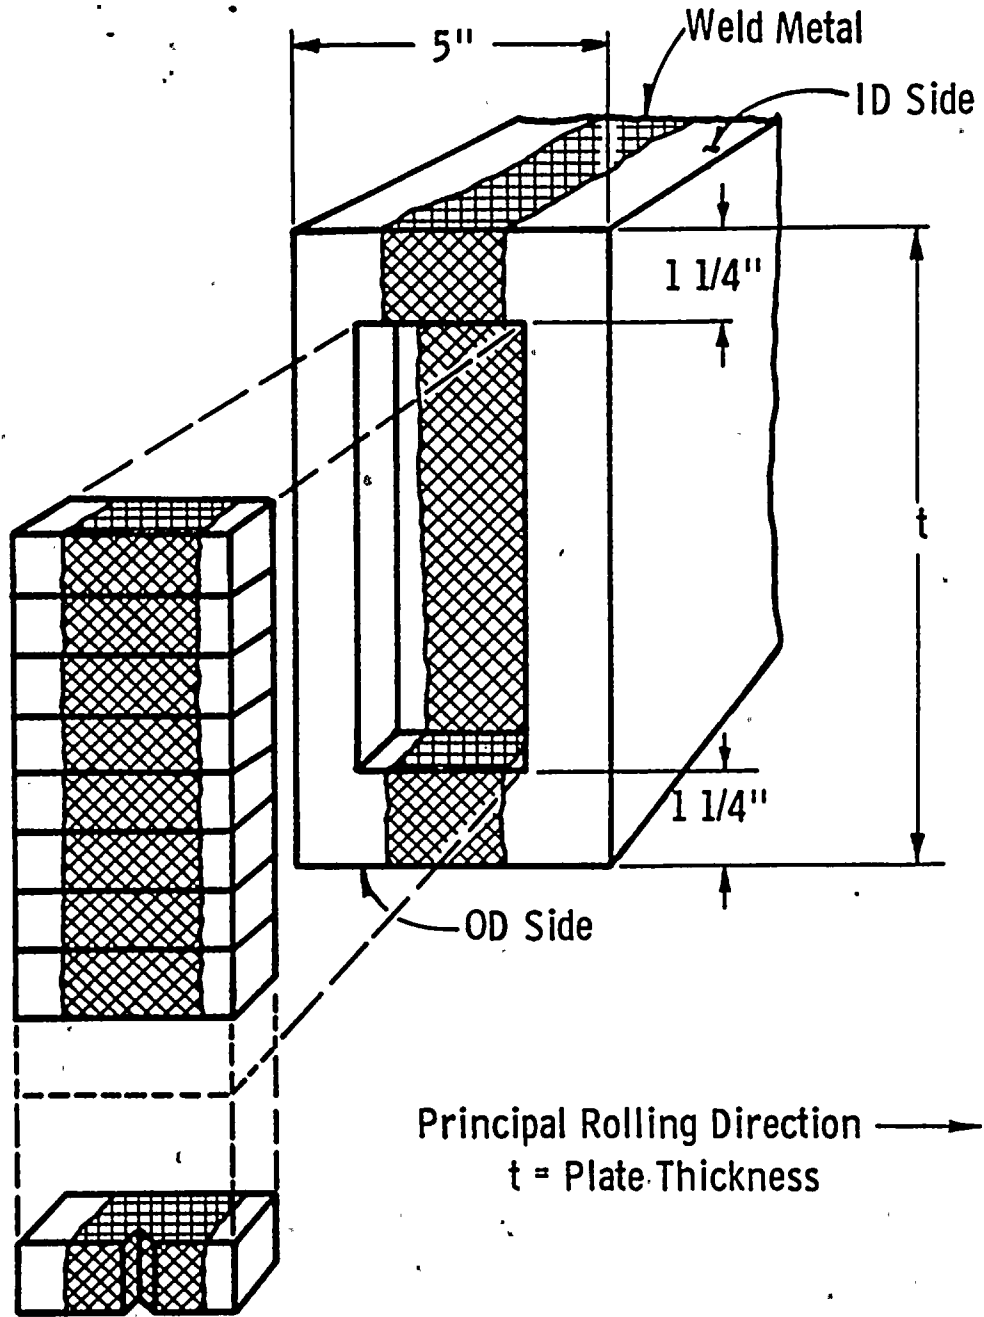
LOCATION OF CHARPY IMPACT SPECIMENS WITHIN WELD METAL TEST MATERIAL
